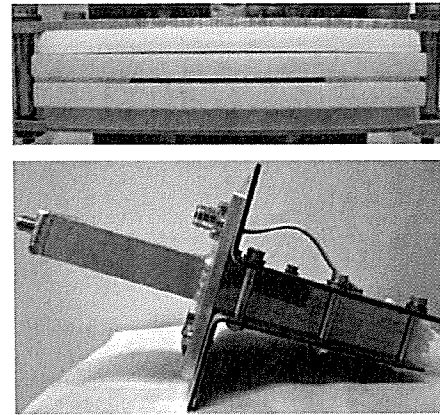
Picture of RITAPP final plasma head assembly looking into slit (top) and isometric view (bottom). Compressive plates can be seen holding insulators, electrodes, and spacers together. Connected to the plates is the gas diffuser box, completing the plasma head assembly. A Type N connector is used to connect electrodes to the matchwork.
